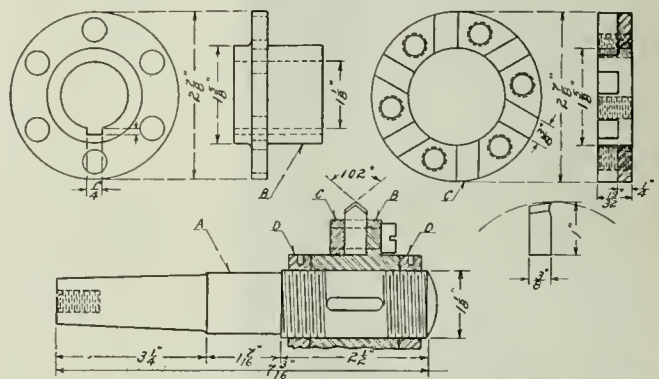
MILLING CUTTER FOR NOSE SLOTTING MACHINE.
